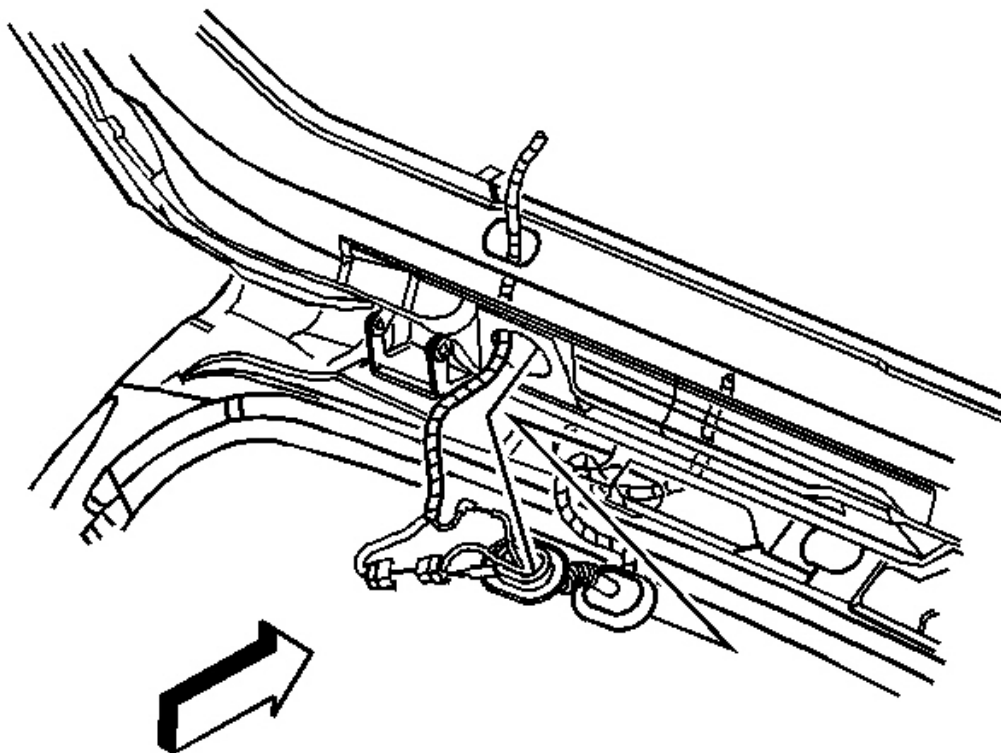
Identifying Wiring Harness Pass Through Boot To Liftgate
